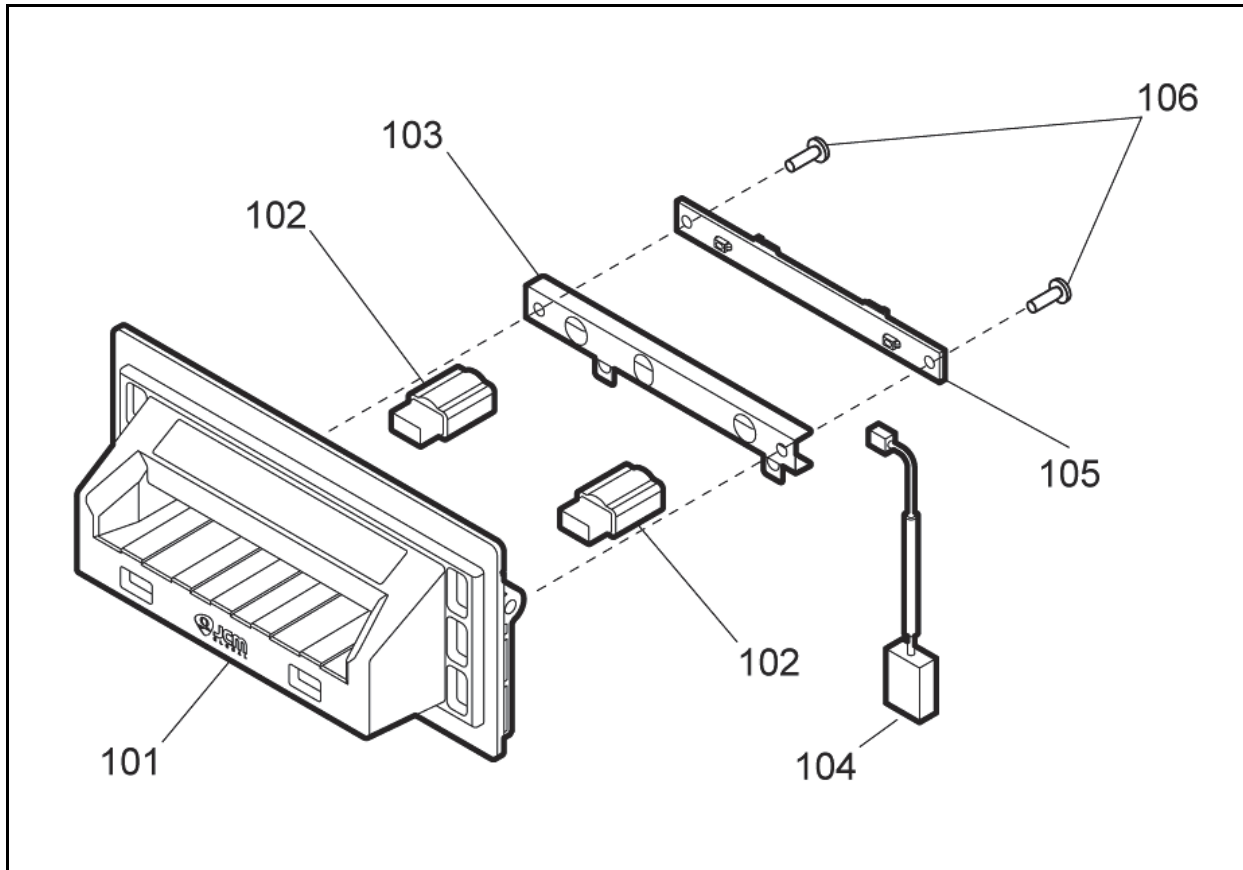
TBV-101-ASH Bezel Unit, Exploded View 1
